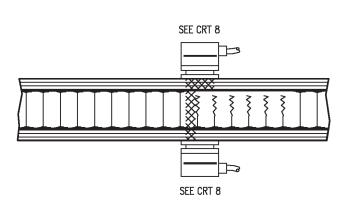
Setup for Inspection of Honeycomb Core Sandwich Assemblies (Sheet 3)
